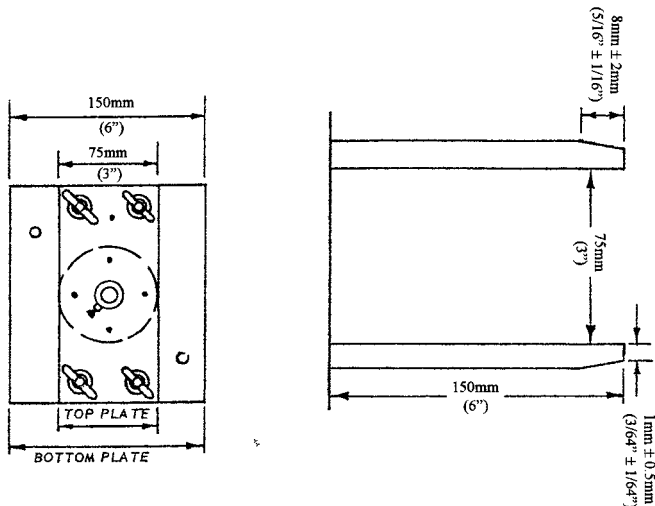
Cylinder Mold with Machined (Tapered) Top Edge
